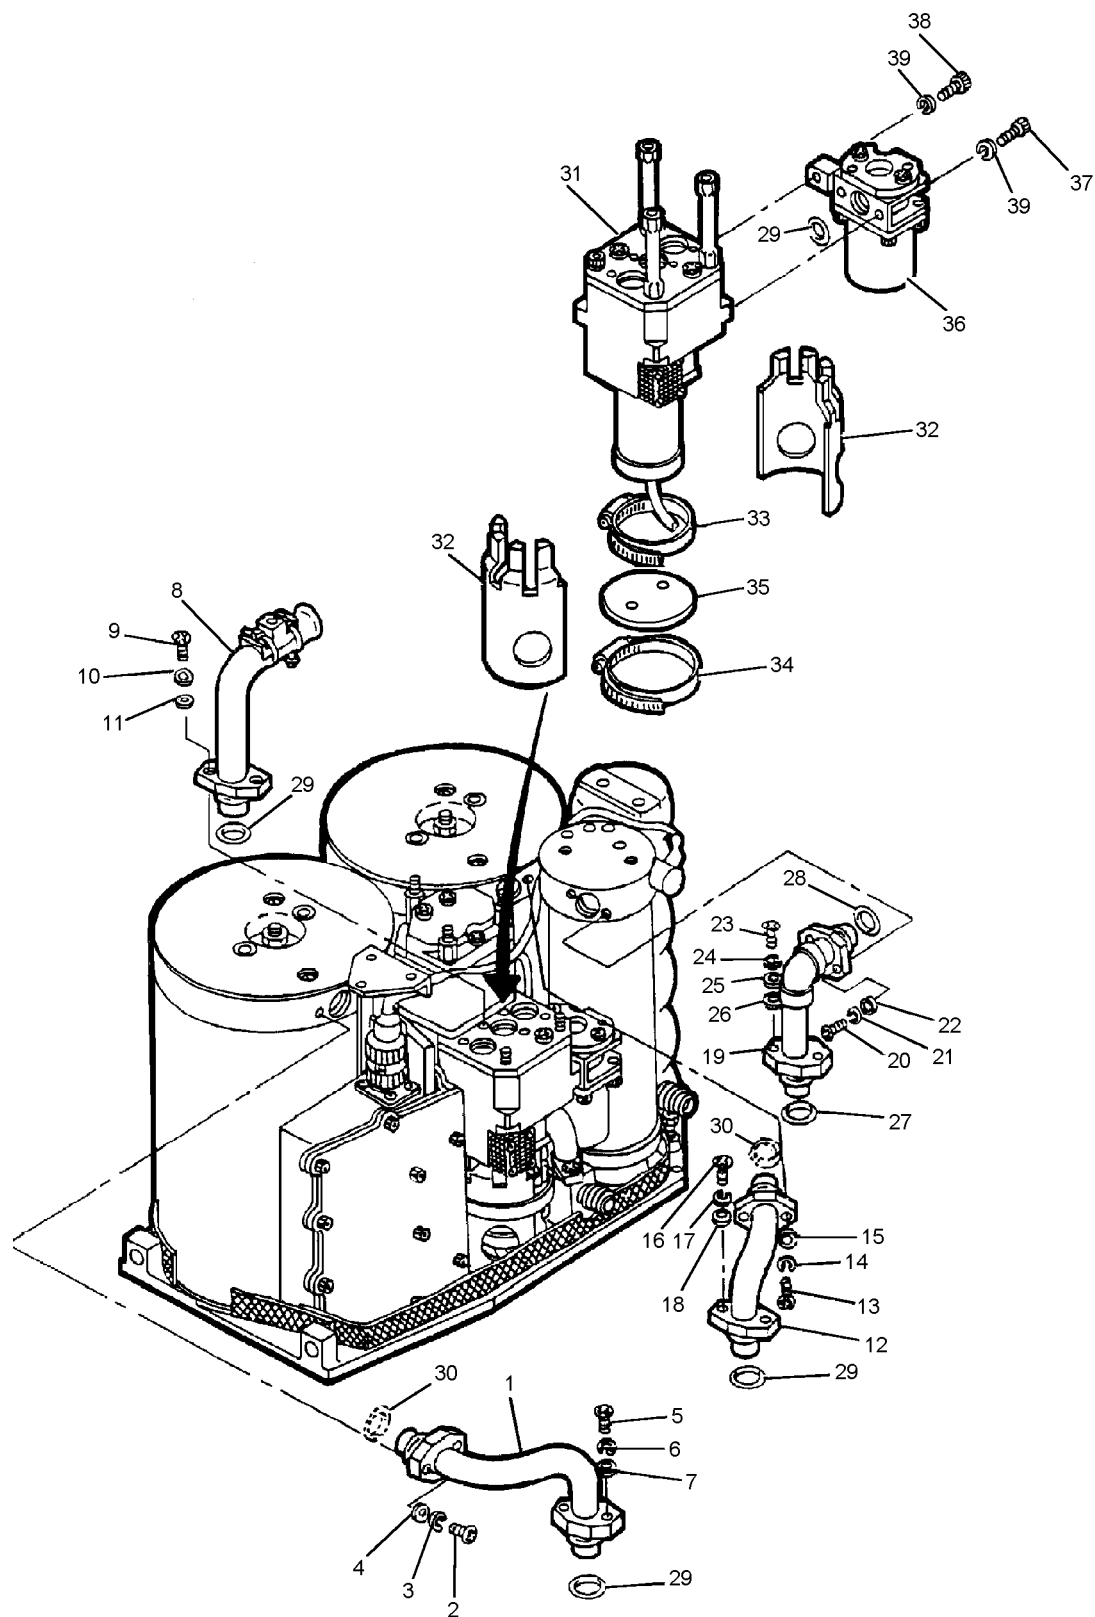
Pressure Reducer Assembly/Rotary Valve Assembly
